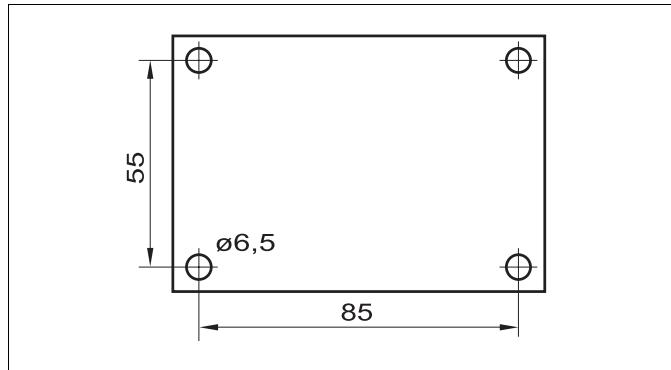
Hole pattern for the U 4814 circulating pump stand
